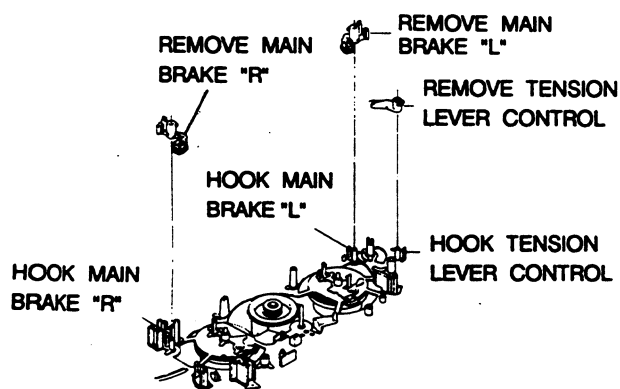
Main Brake L/R and Tension Lever Control Removal
